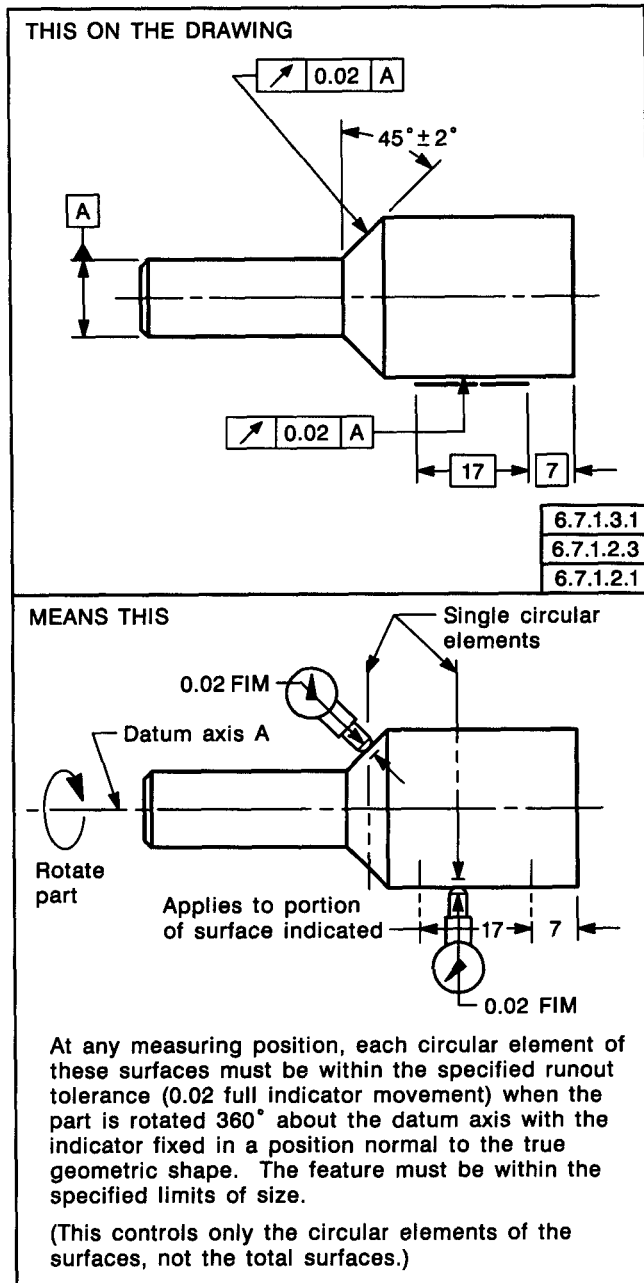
SPECIFYING CIRCULAR RUNOUT RELATIVE TO A DATUM DIAMETER
